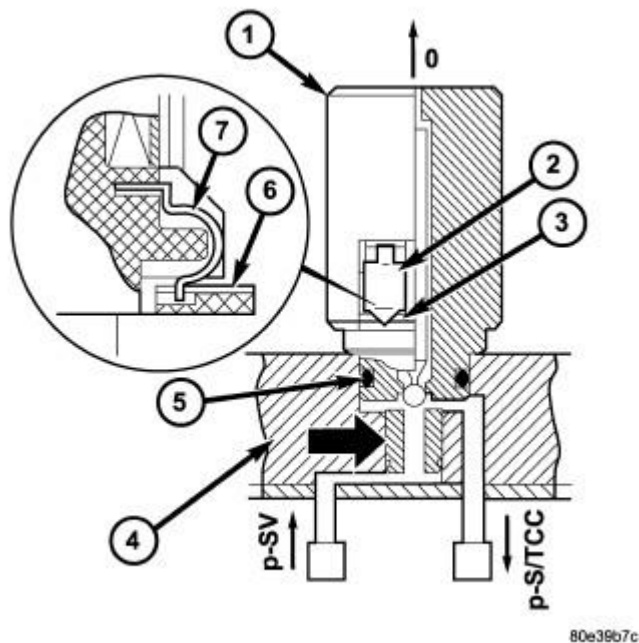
Torque Converter Lockup Clutch PWM Solenoid Valve
